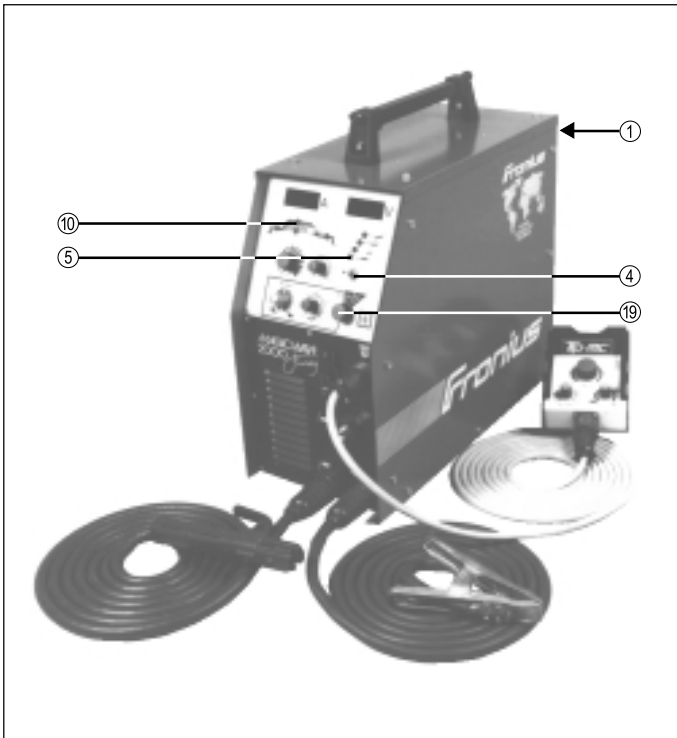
The Magic Wave 2000 Fuzzy resp. Transtig 2000 as a manual electrode welding machine, consisting of: power source with control unit, TPmc manual remote control unit (may be used optionally) and welding cables.
